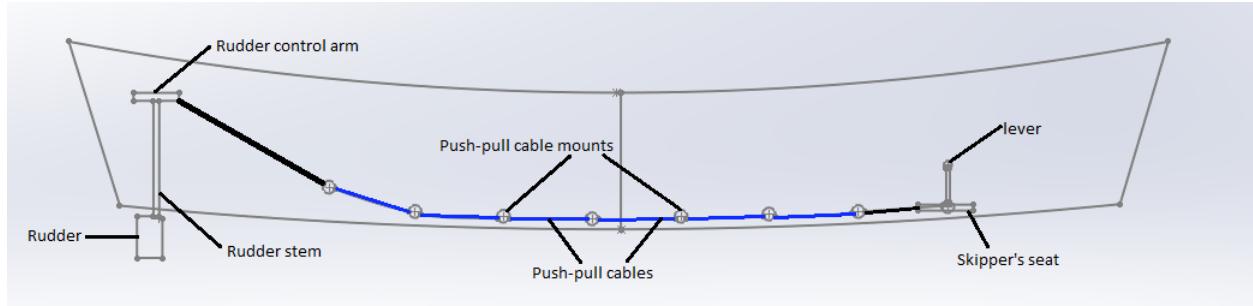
Top view of the steering system inside the boat with dimensions (in inches).
